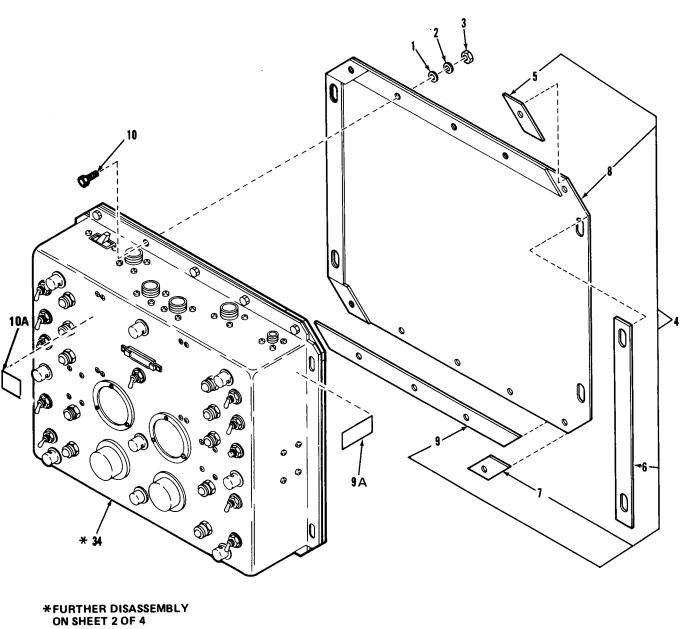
Control Panel Assembly Panel Cover (Sheet 1 of 4)
